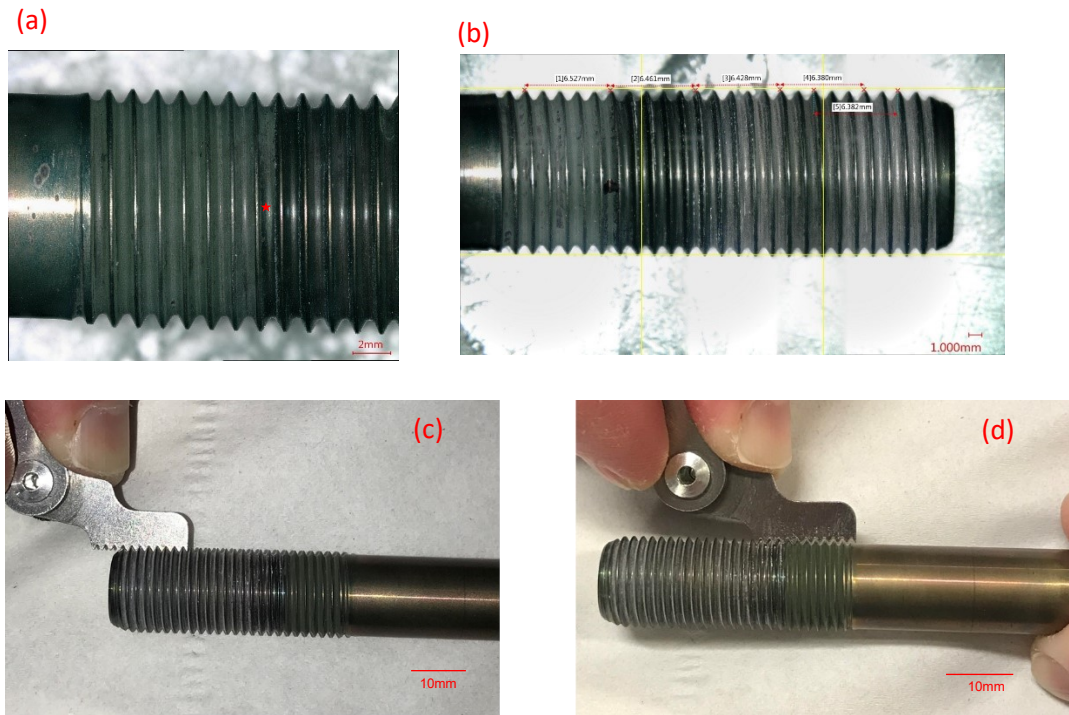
(a) and (b) show the optical measurements of a tested bolt, the thread gauge at the engaged threads (c) and the exposed threads (d).
